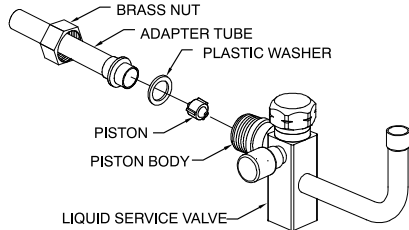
Liquid Service Valve with Heating Piston and Adapter Tube
